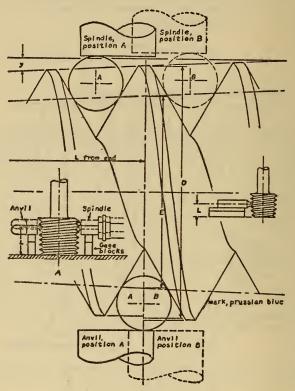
Measurement of pitch diameter of taper thread gages by the two-wire method
